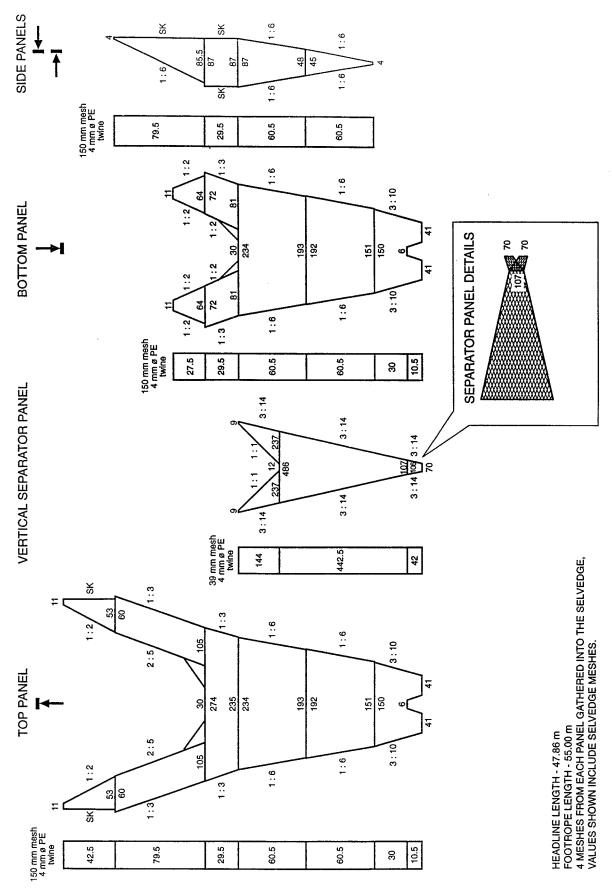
Example of a specification for a trouser trawl with vertical dividing panel
